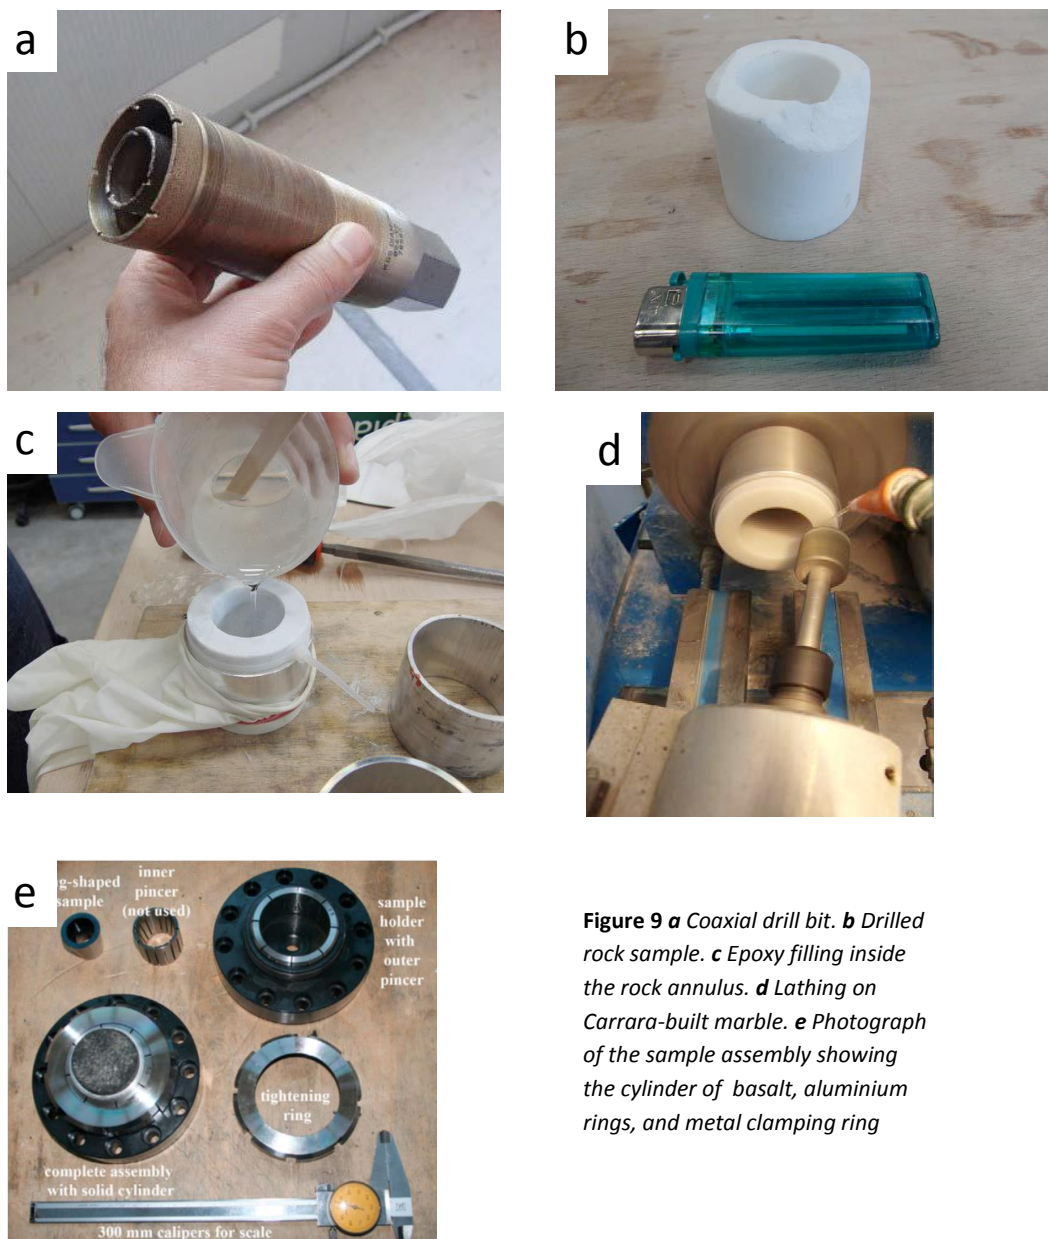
a* Coaxial drill bit. *b* Drilled rock sample. *c* Epoxy filling inside the rock annulus. *d* Lathing on Carrara-built marble. *e* Photograph of the sample assembly showing the cylinder of basalt, aluminium rings, and metal clamping ring
